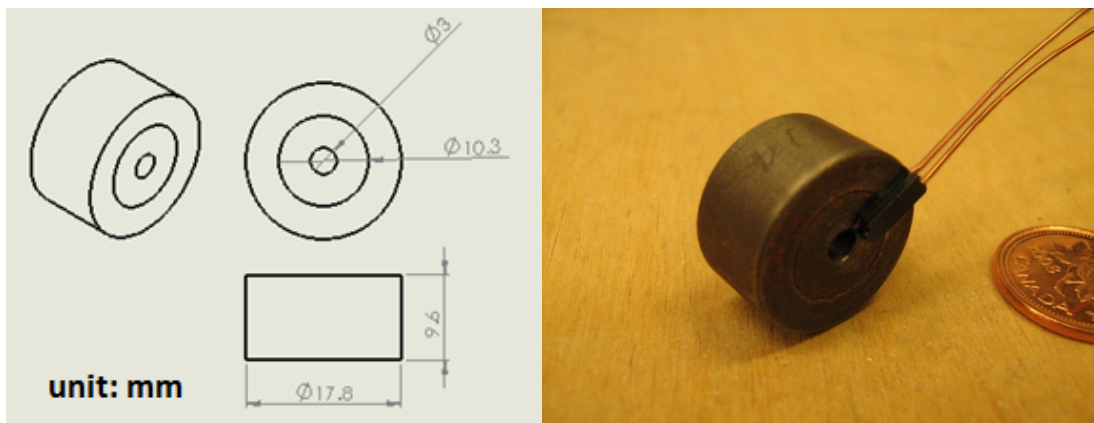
Left figure shows Solidworks drawing of the coil, and its dimensions. The actual coil has outer diameter of 10.3mm, inner diameter of 3.0mm, shielding material have outer diameter of 17.8mm, and inner diameter of 10.3mm. Right figure shows picture of the coil, two copper wires secured with epoxy is attached.
